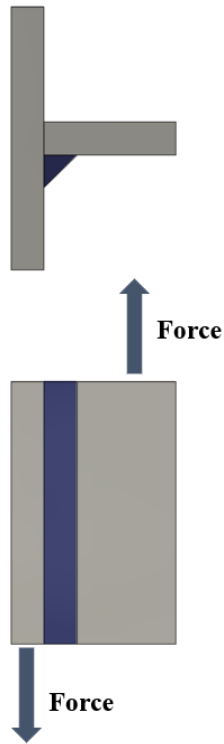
Loads present in parallel or shear loaded weldments.
